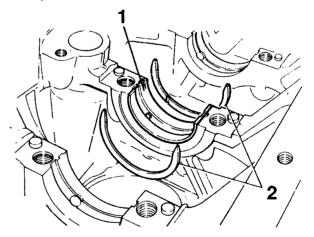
Crankshaft thrust washers. 1 Centre main bearing 2 Thrust washers
